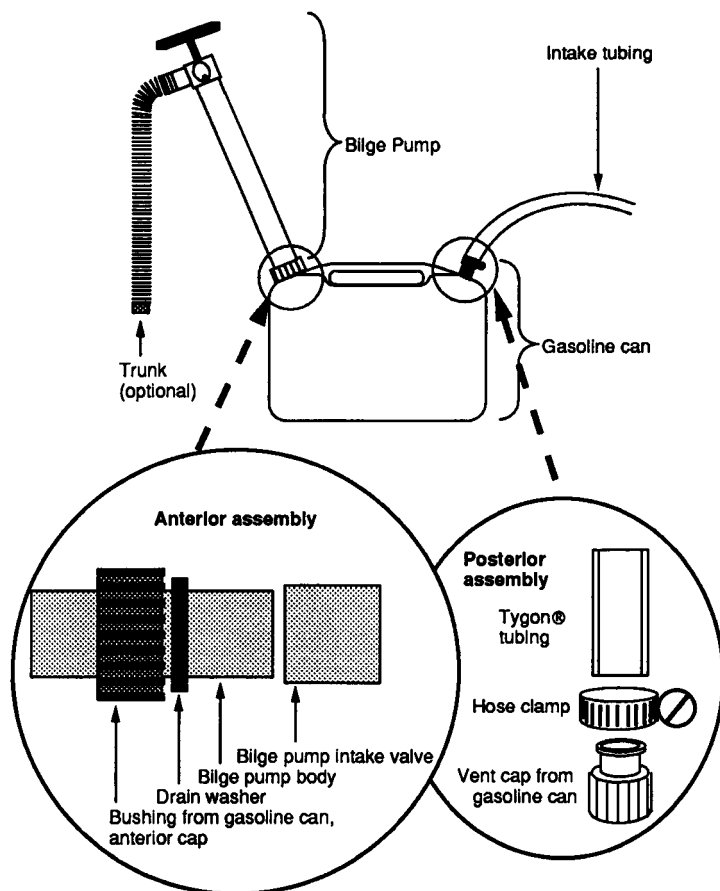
Lateral view of the fluid transfer system, fully deployed (above), and with assembly details (below). Although the bilge pump is sold with the trunk attached, it could be removed with no major functional loss. We have left ours intact for aesthetic purposes.
